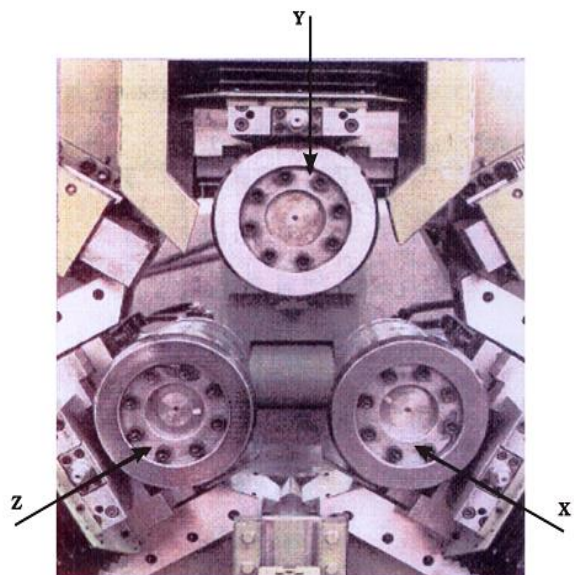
a Flow Forming Machine with arrangement of three rollers
